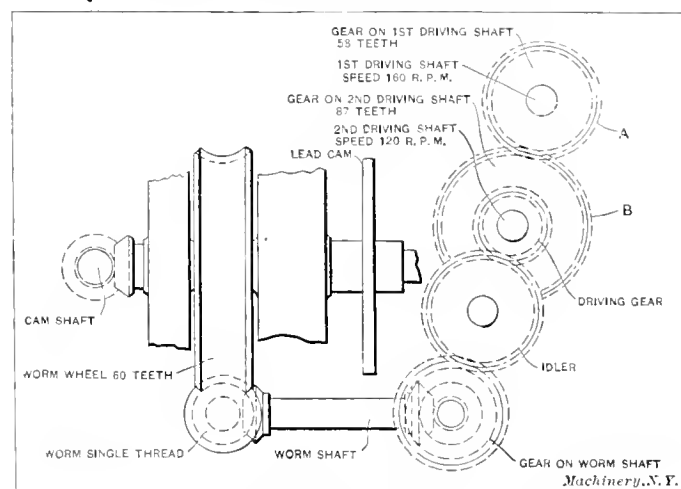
Diagram of Gearing on the No. 0 Brown & Sharpe Automatic Screw Machine
